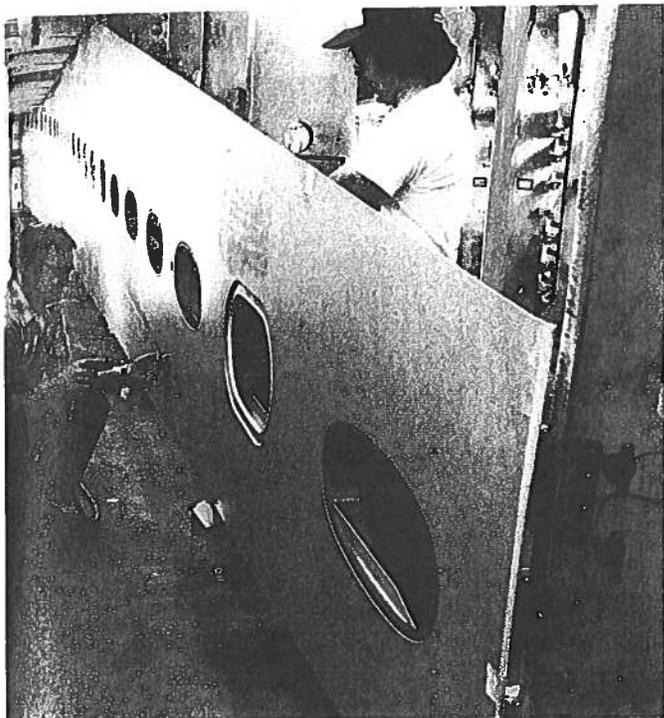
Many sheet metal workers are needed to build aircraft bodies. While the techniques are specialized, aircraft sheet metalworkers use the basic principles of assembling and fastening sheet metal.
